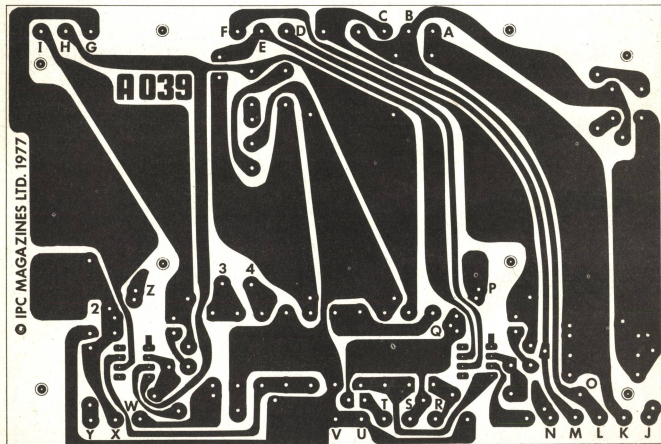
The PCB shown copper side. The scale factor is one; ready made boards may be obtained from the PW Readers' PCB service. Details page 593.
